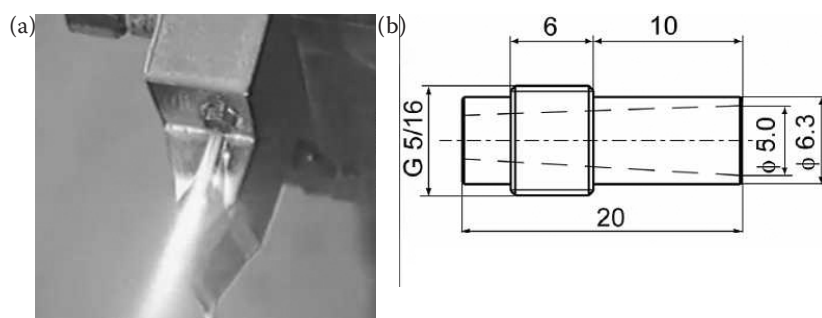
Nozzle and cooling of ChipBlaster company (a) example of cooling and (b) shape of nozzle tube
